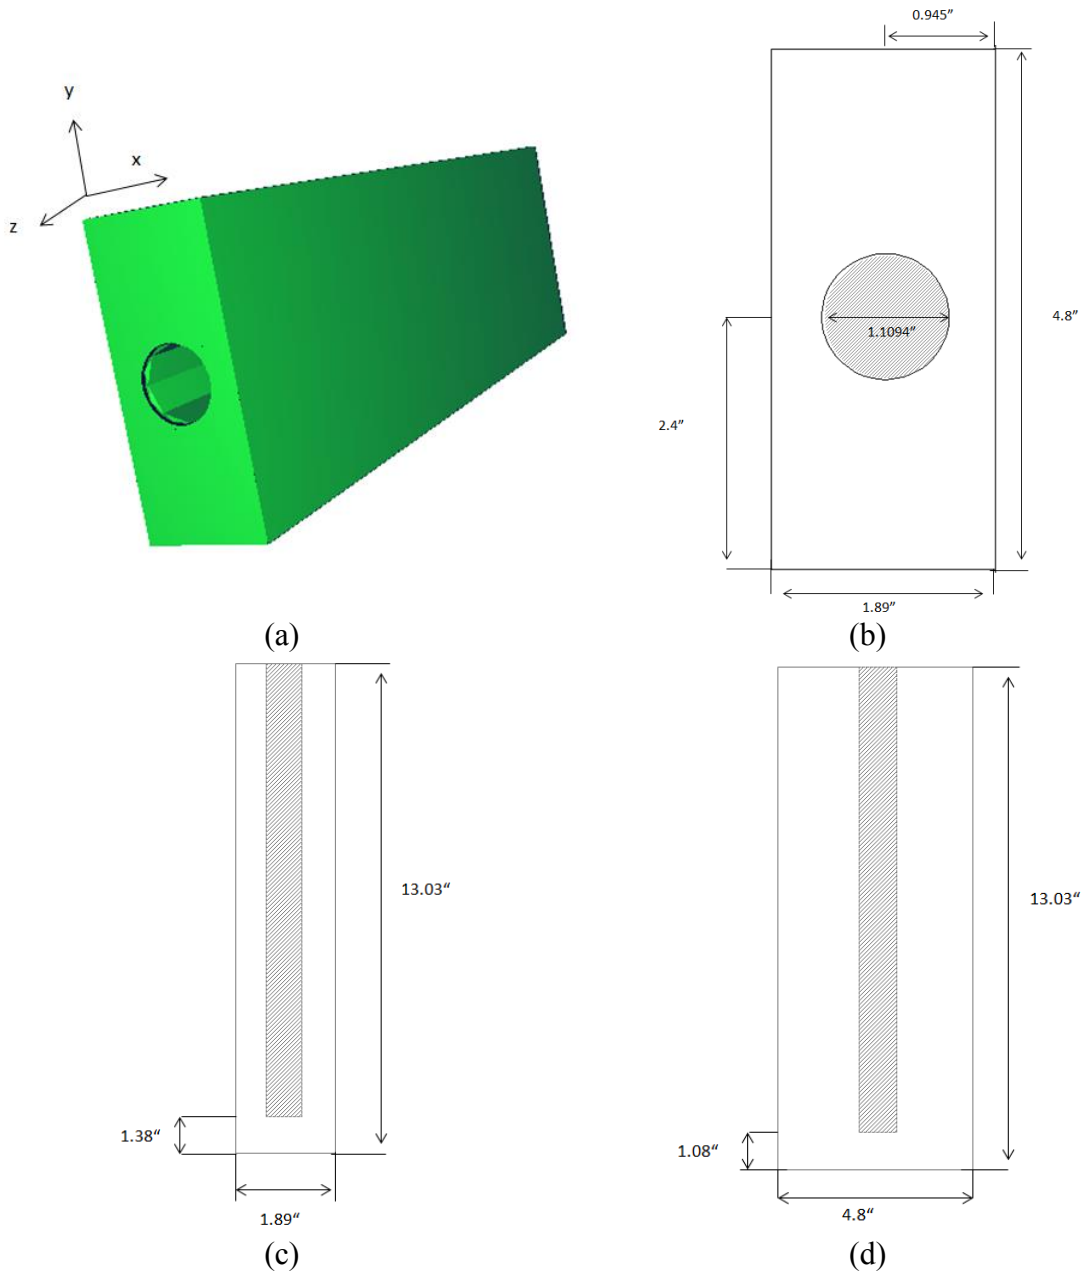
Drawings for UHMWPE block machining: (a) 3-D view, (b) x-y view, (c) x-z view and (d) y-z view
